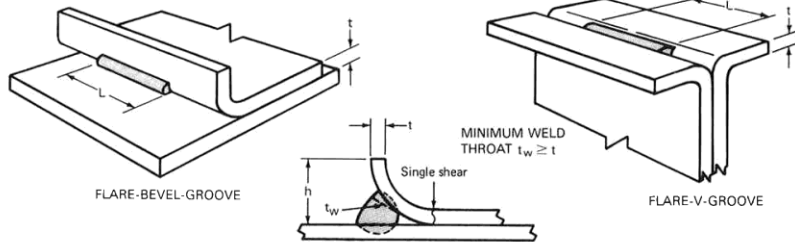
B — Single Shear in Flare-Groove Welds (See 2.2.5(2))
